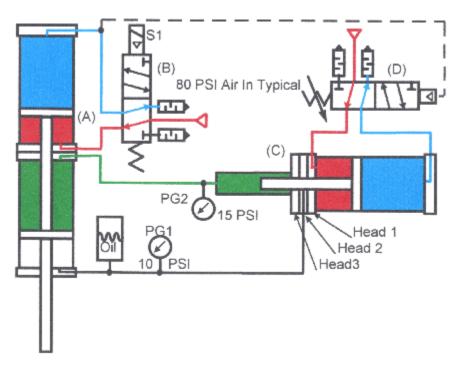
Tandem-cylinder air-oil intensifier circuit with typical 3head intensifier. Tandem cylinder is retracting rapidly.
